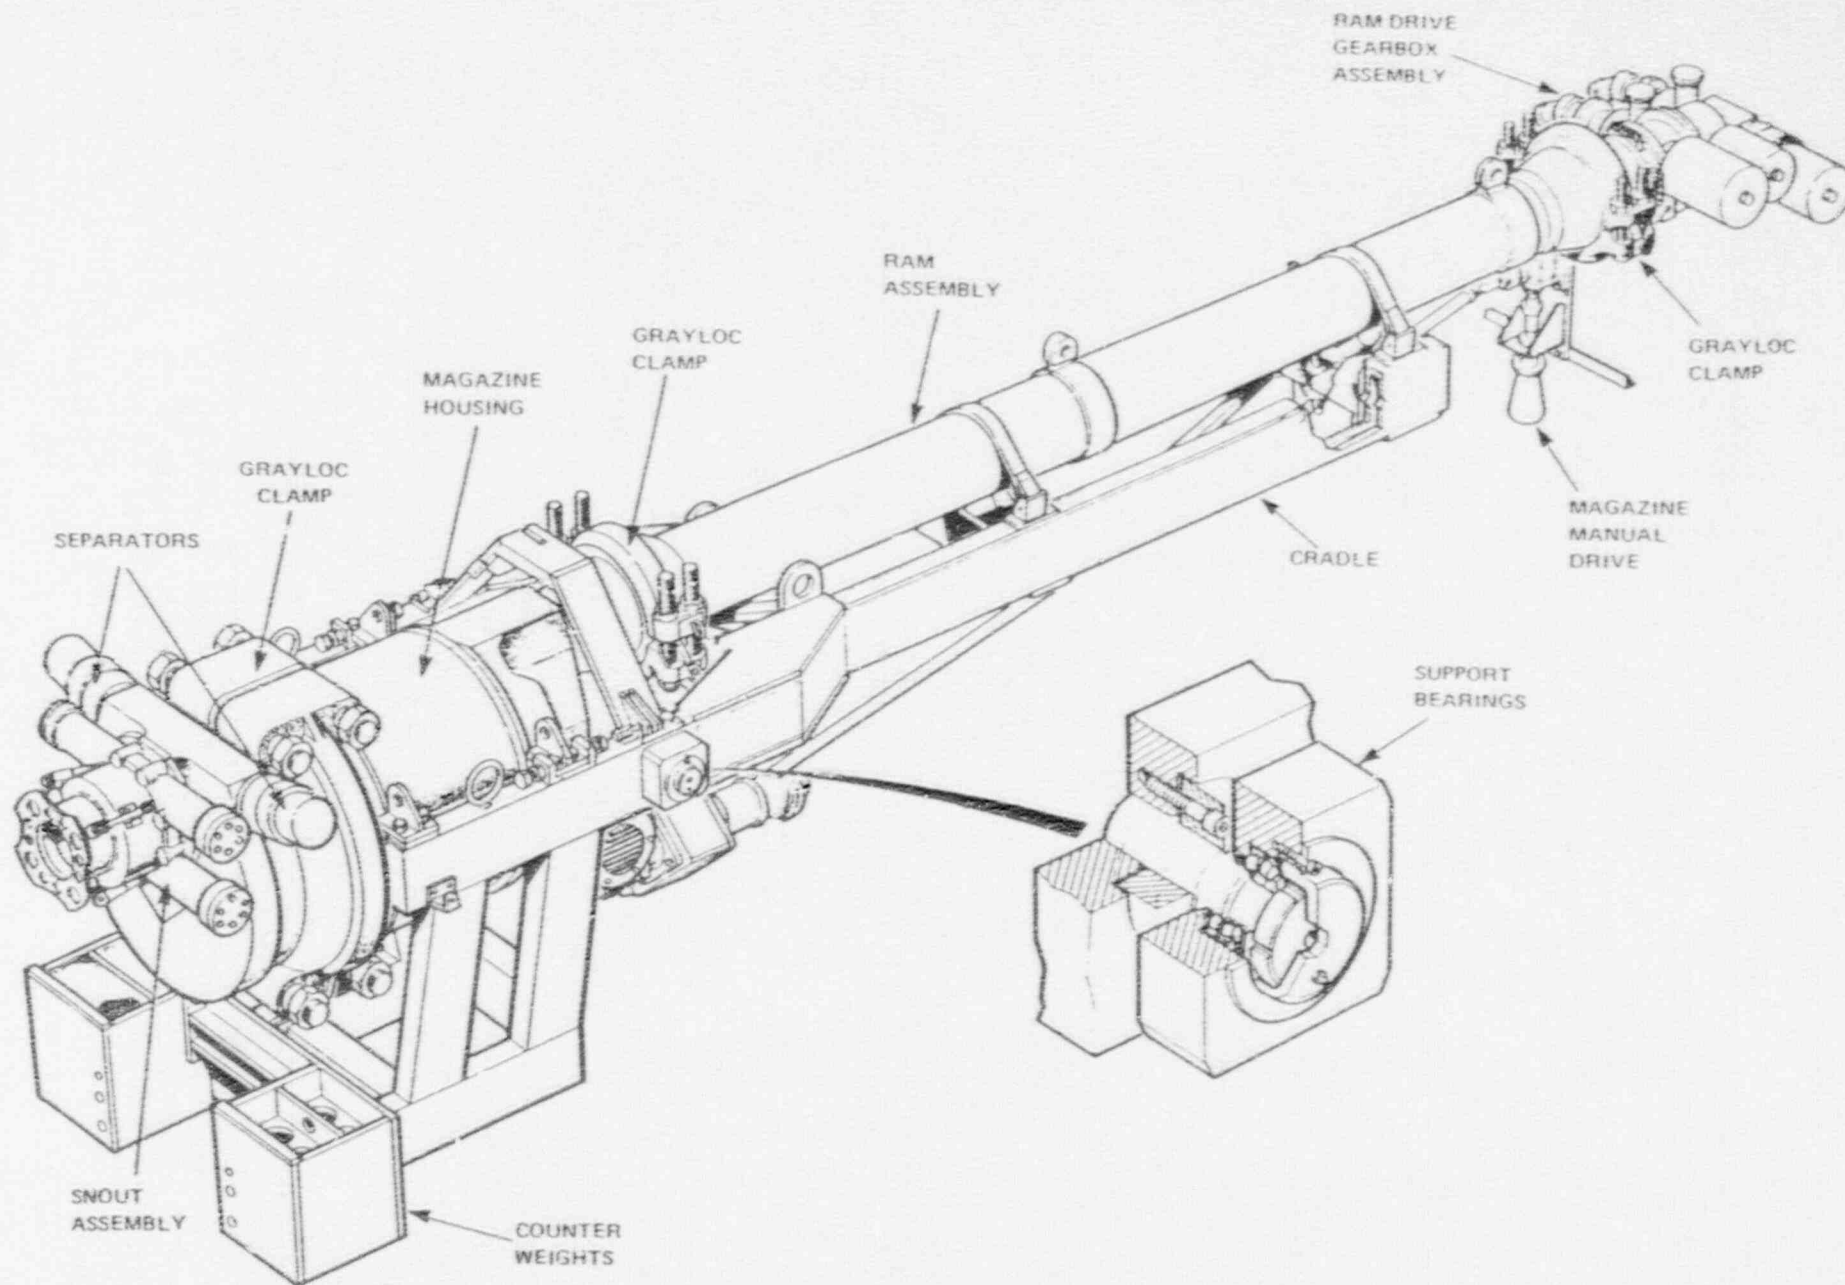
PICKERING/CANDU 6 FUELING MACHINE HEAD
